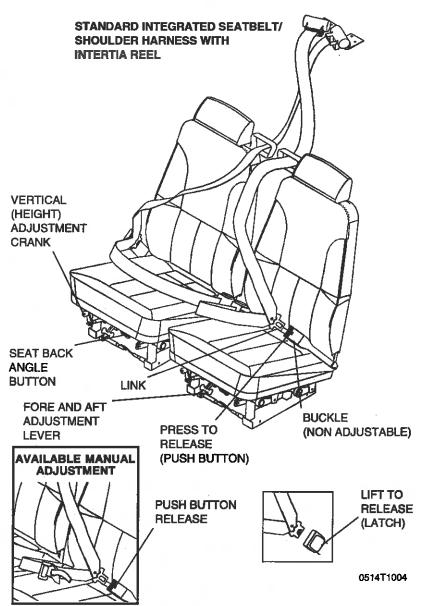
Crew Seats, Seat Belts and Shoulder Harnesses
